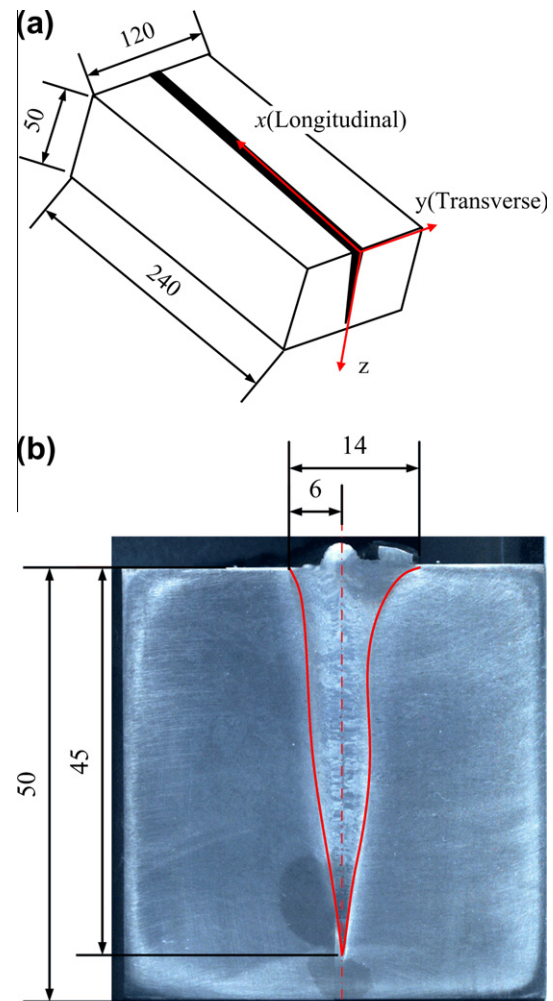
(a) Dimensions of the welded plate, and (b) Fusion zone profile.
